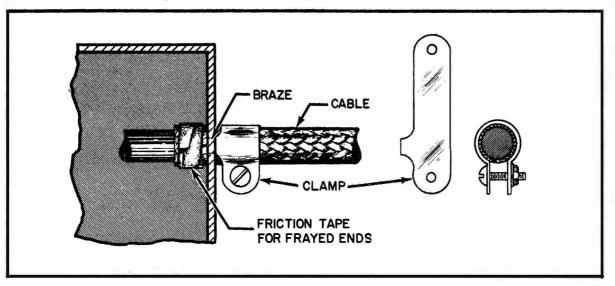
Clamps Brazed to Enclosures (Method a).
